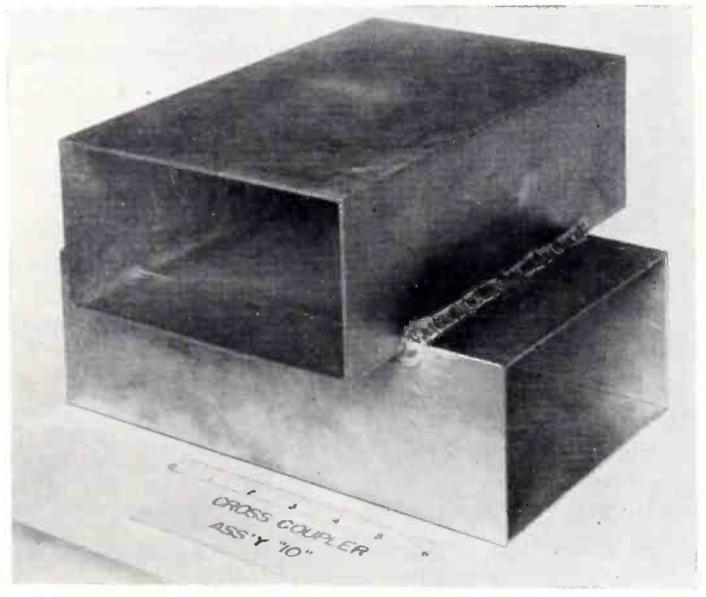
Typical production assembly using the heli-arc butt weld.
